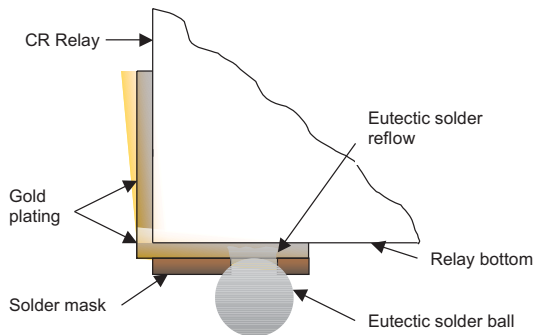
A view of the CR Relay after reflow soldering and the forming of a eutectic solder between the bottom of the relay and the BGAs.
